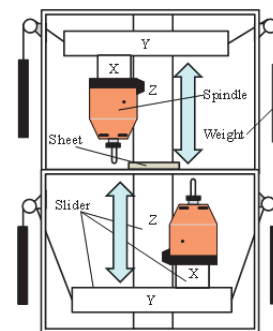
Schematic illustration of double side friction stir incremental forming equipment
